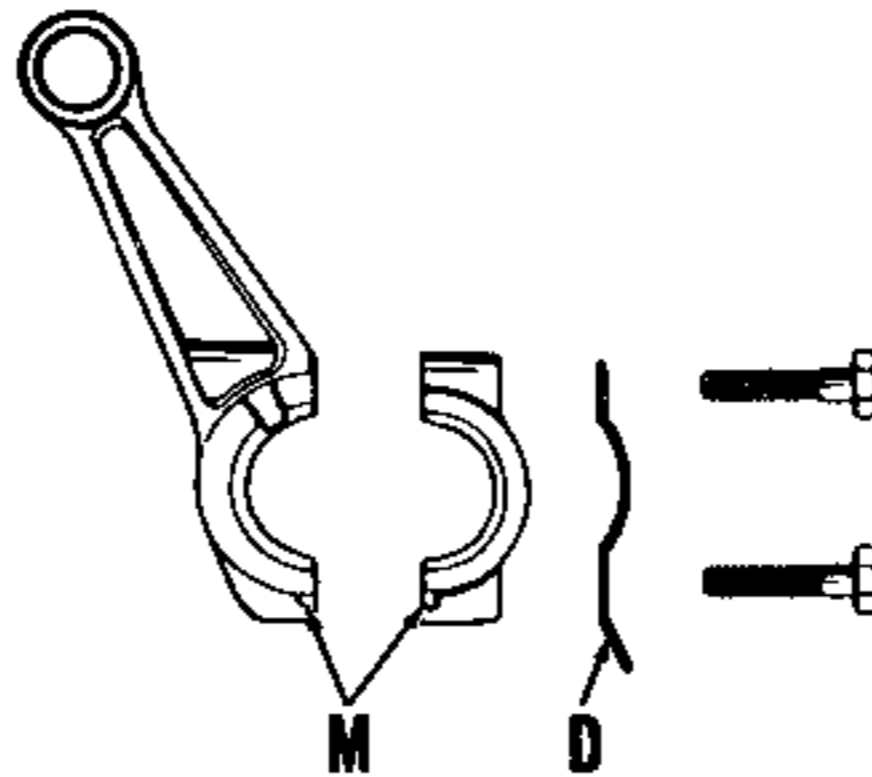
Connecting rod assembly used on Models VH70, VM70, VM80, VM100, HH70, HM70, HM80 and HM100. Note position of oil dipper (D) and match marks (M).
